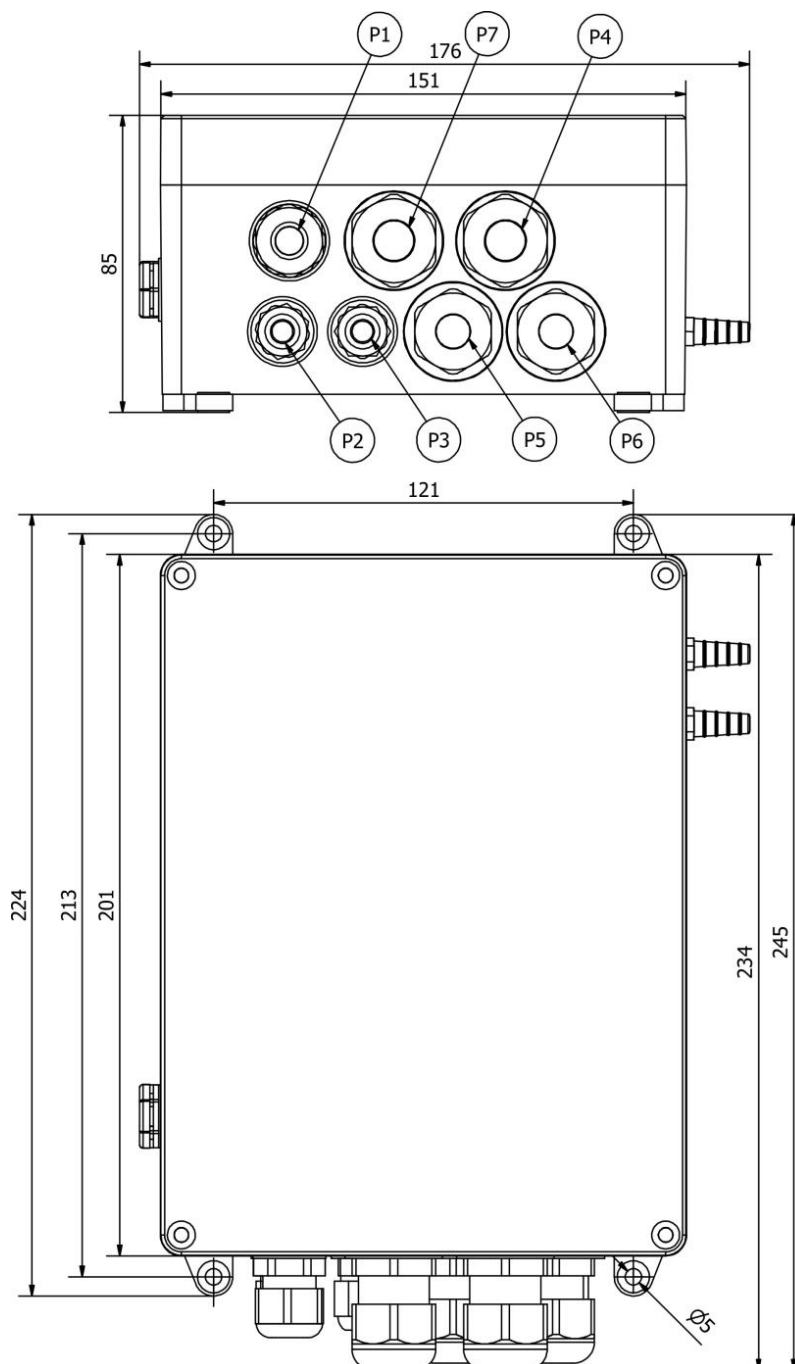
MAC-D Min controller in IP65 enclosure (version 4) - dimensions.
